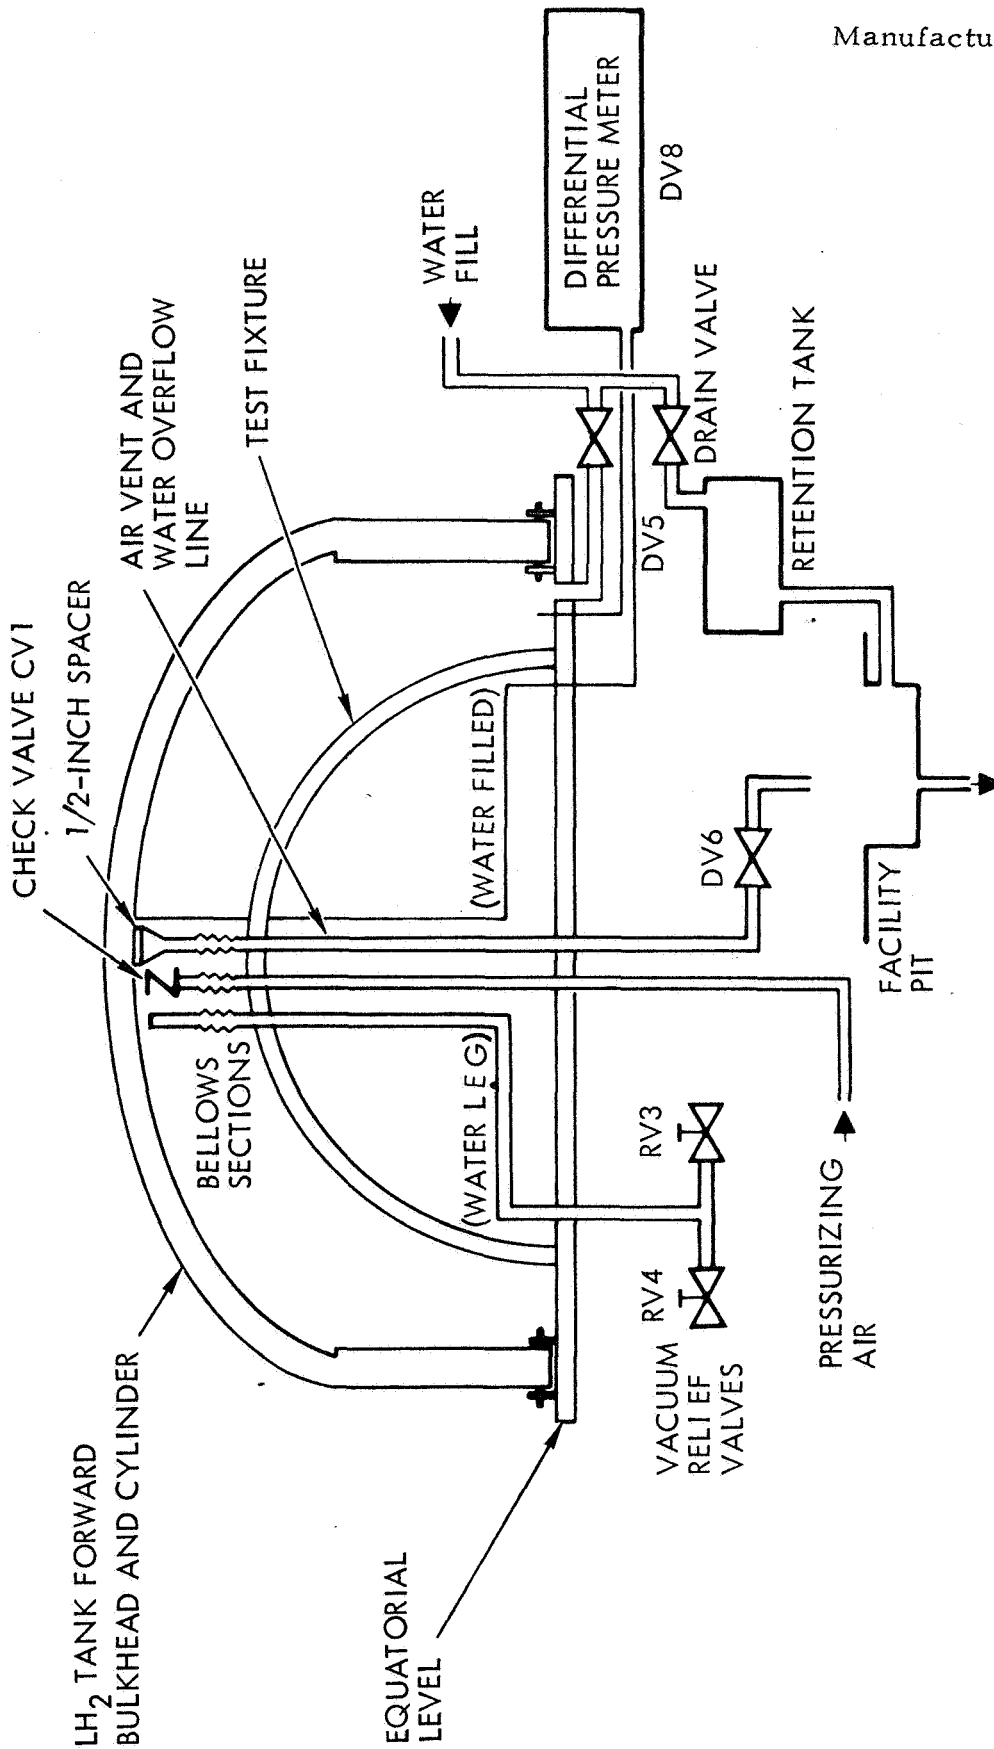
Hydrostatic Test of Tank's Forward Bulkhead Assembly
